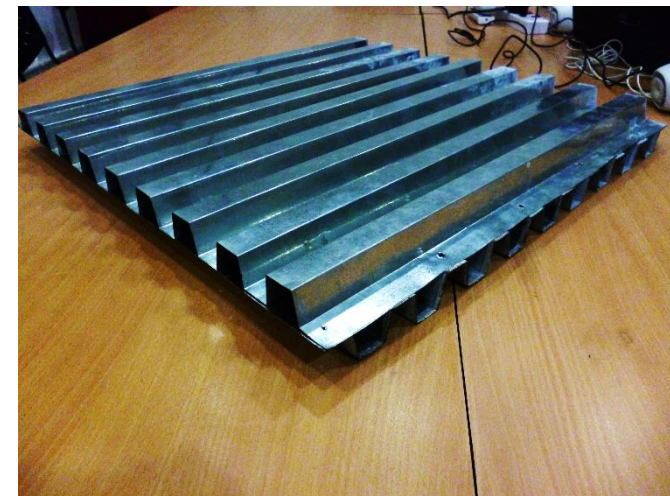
Sample Criss-cross Corrugated Sheet Joining
